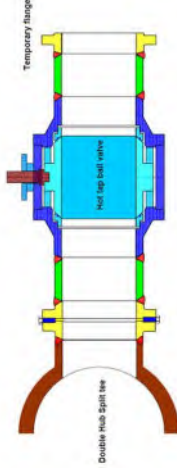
Illustrate the position of hot tap fitting with tapping valve on the line pipe
